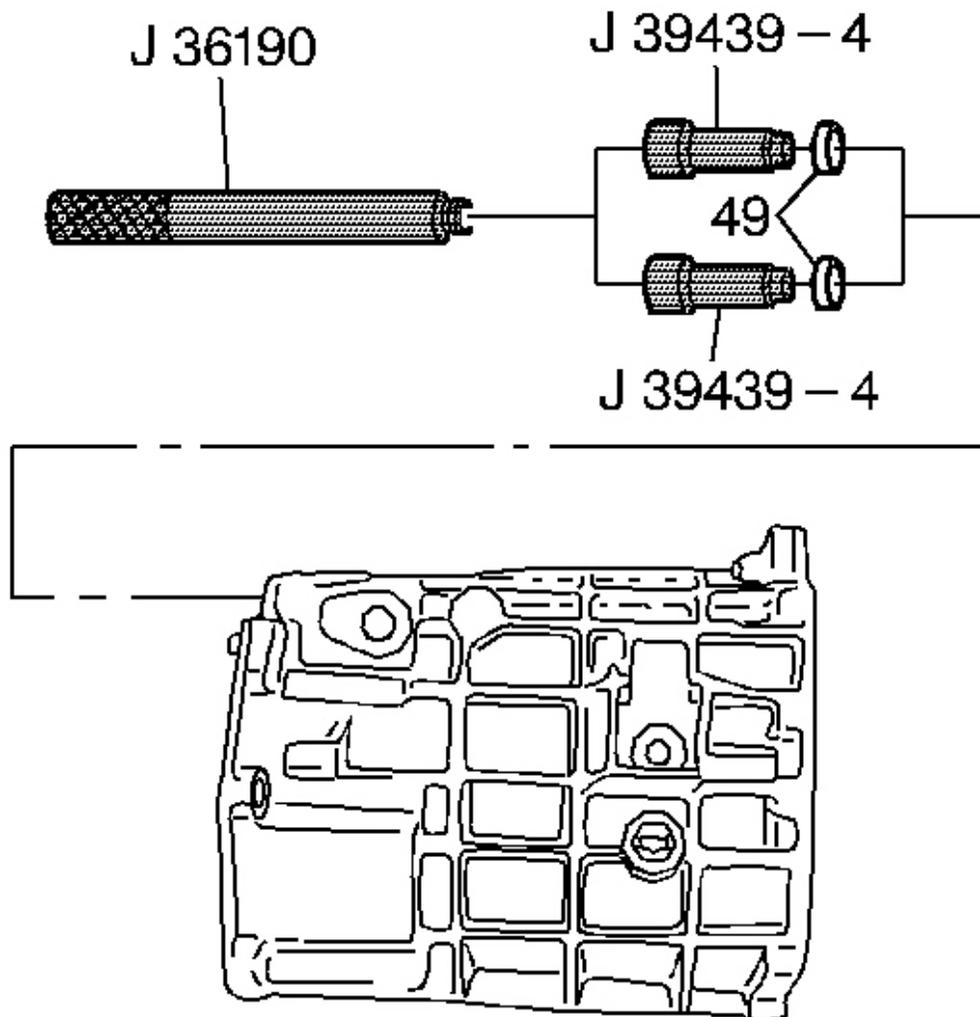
Installing 1st/2nd & 3rd/4th Shift Shaft Bushings
